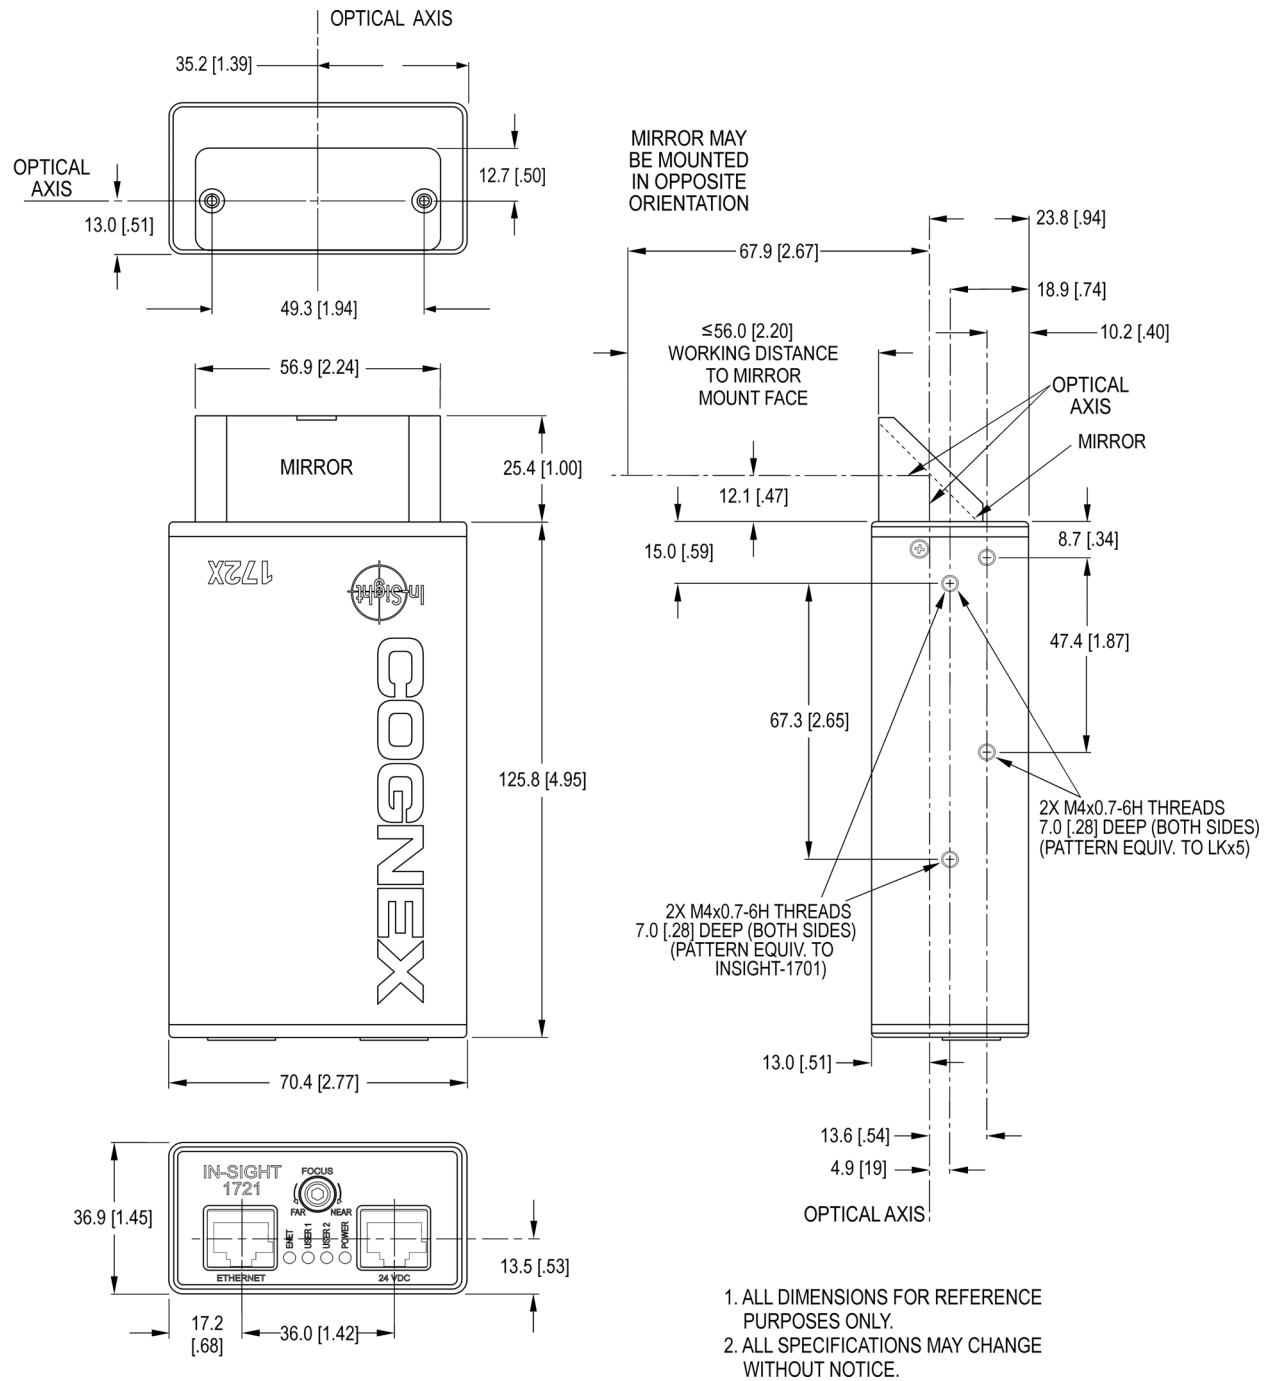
In-Sight 1721/1722 Wafer Reader Dimensions with Horizontal Mirror Mount (Recommended Configuration)
